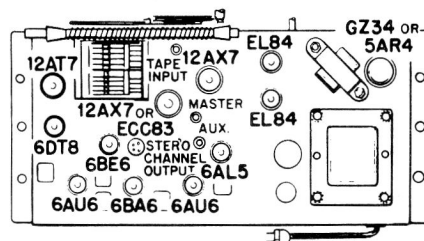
Top View of 12B1 - 12B1A Chassis. Tube Locations Shown.
